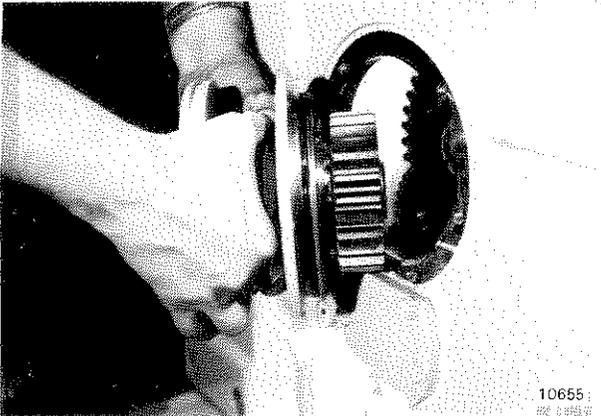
ARRANGEMENT OF THE PTO GEAR ASSEMBLY FOR THE WINCH WITH A 117:1 GEAR RATIO
